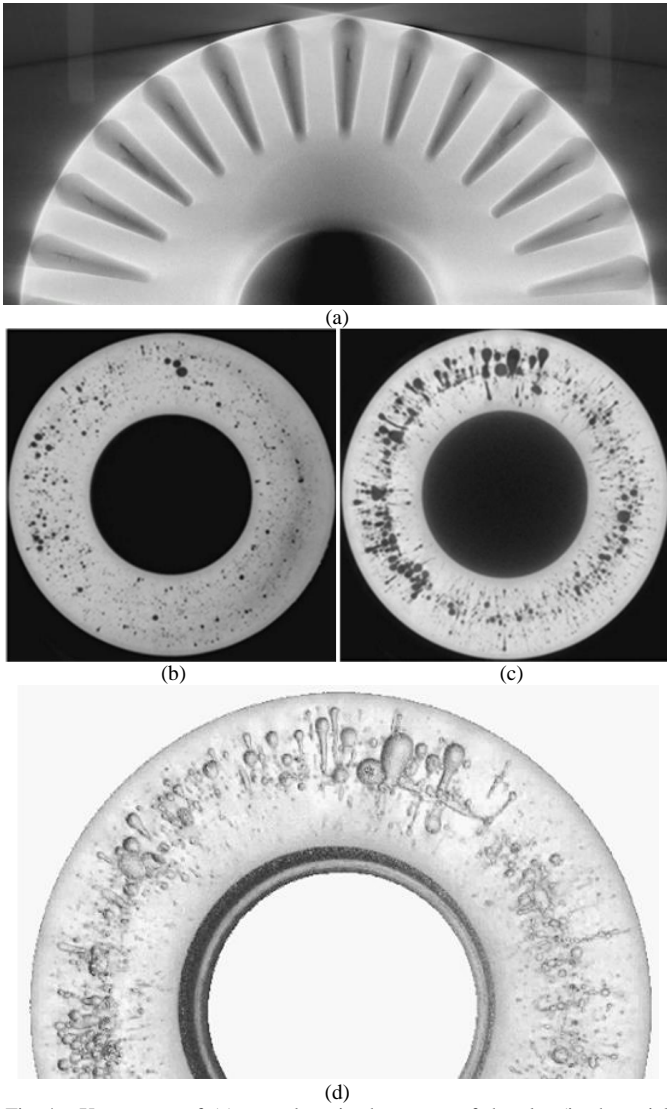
X-ray scan of (a) rotor bars in the center of the slot (in the axial direction), (b) axial center of end ring, (c) end ring near the rotor core, and (d) 3D reconstruction of the 2D x-ray scan of the end ring shown in (b)-(c) for a 440 V, 1.5 kW Al die cast induction motor
